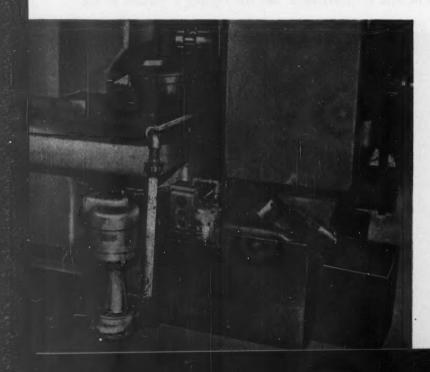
A magnetic coolant separator is employed on the automatic chucking machine shown in Fig. 8 to remove cast-iron particles from the cutting oil.
